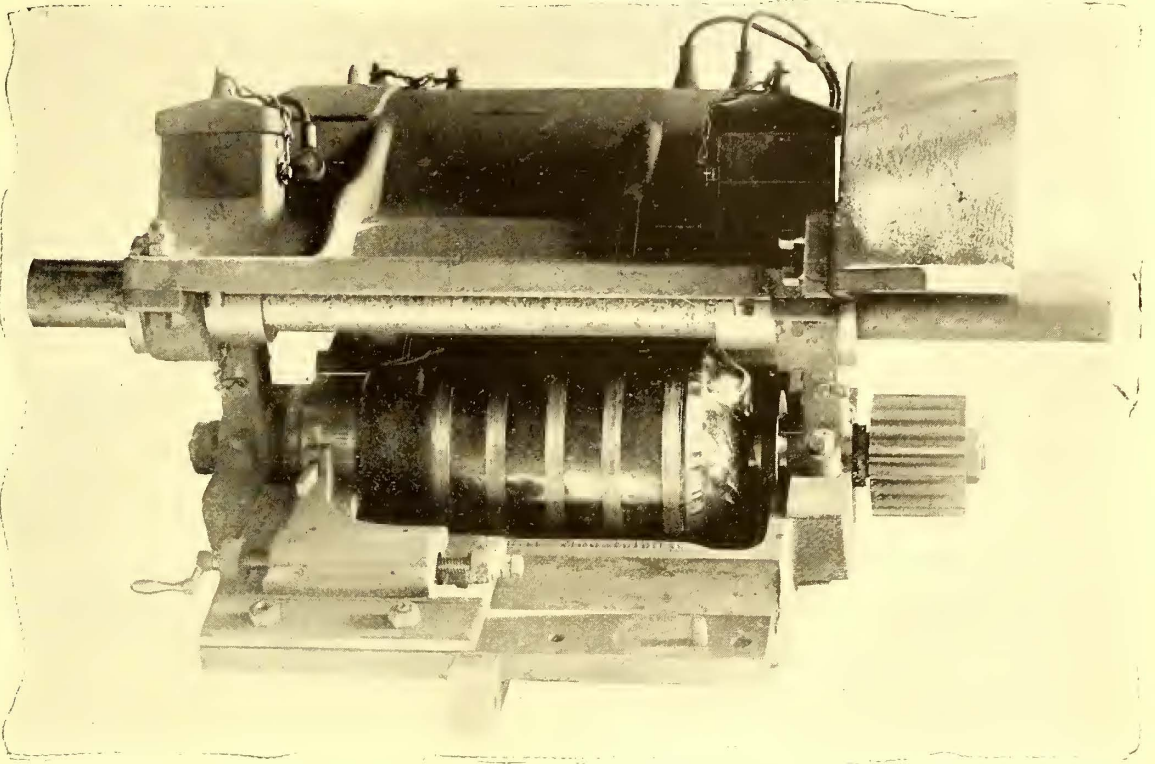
CARD MOTOR WITH ARMATURE LOWERED SHOWING COMMUTATOR TURNING ATTACHMENT.
